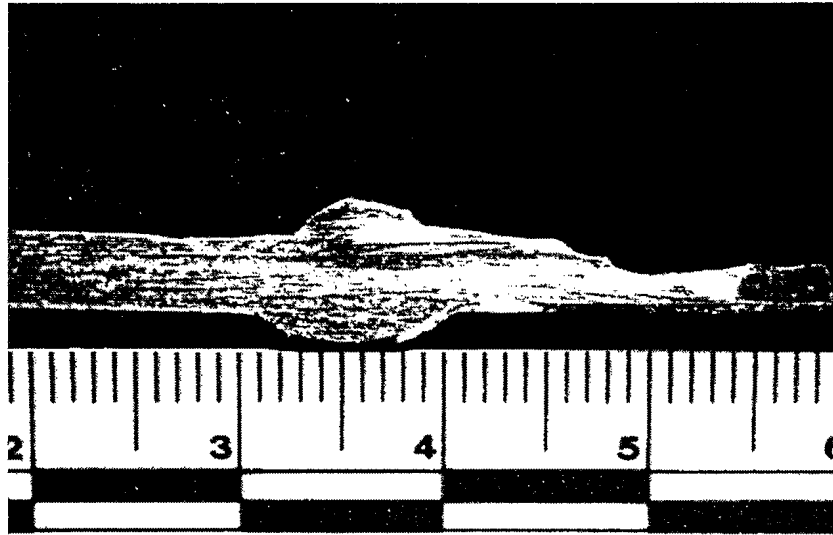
Cross-section showing erosion corrosion downstream from a weld.
